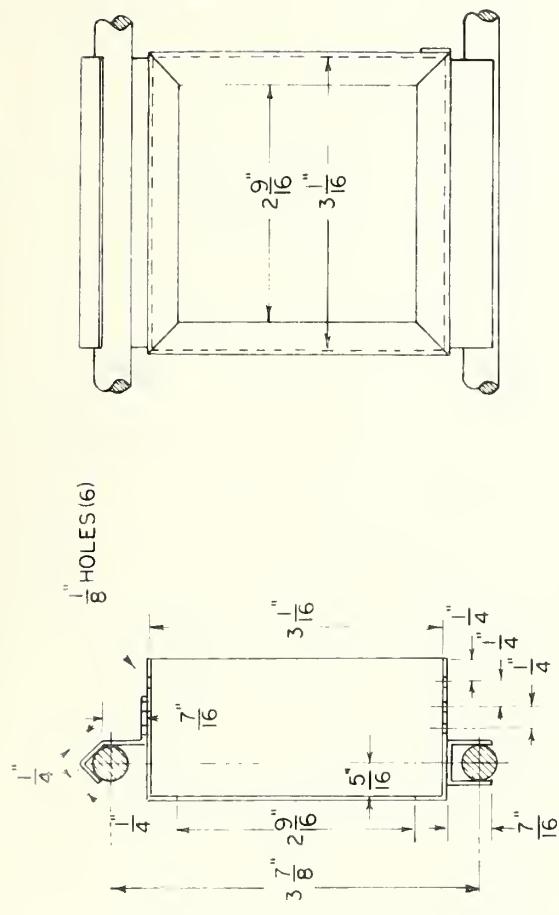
DETAILS OF SPECIMEN HOLDER AND PILOT BURNER
